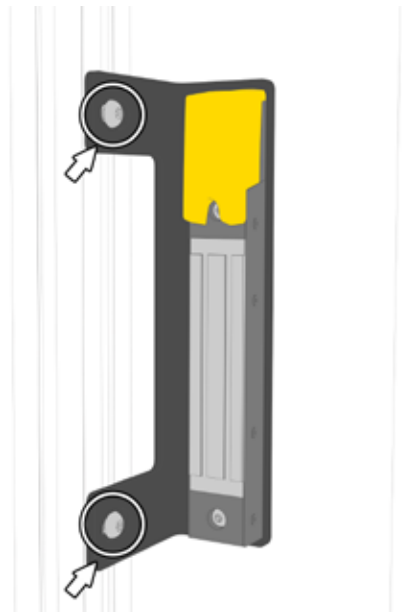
Attach the mounting plate with the magnetic guard lock to the profile and tighten the Torx screws M8 x 12 mm.
